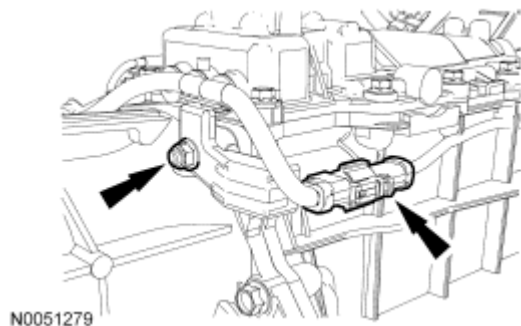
Locating RH Catalyst Monitor Sensor Electrical Connector & Nut
